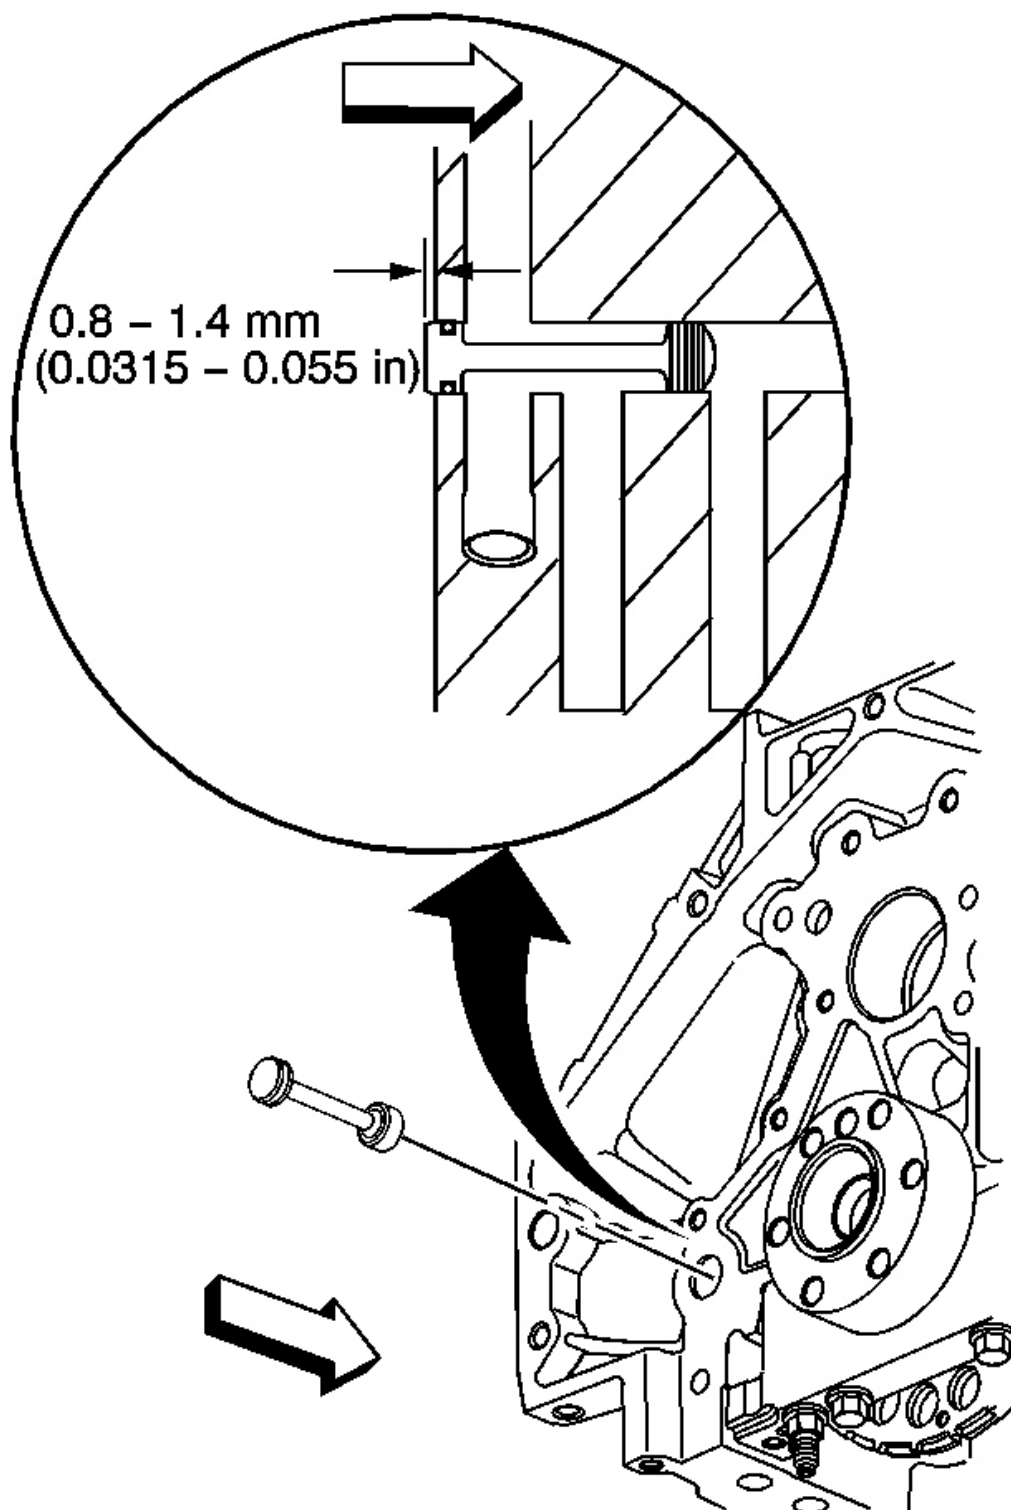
View Of Engine Block Rear Oil Gallery Plug
